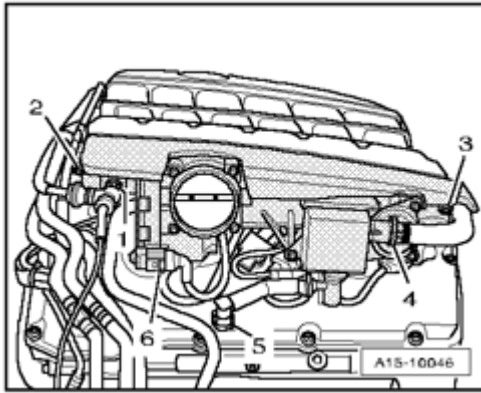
Vacuum Hose, Bolts, Crankcase Breather Hoses & Throttle Valve Control Module J338
